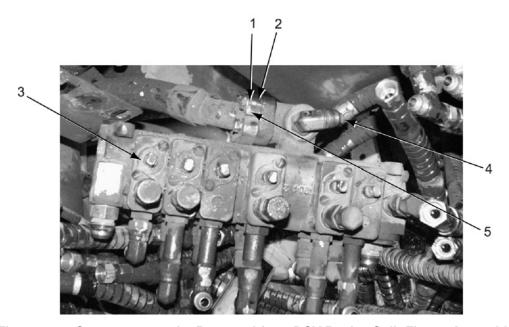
Components to be Removed from DCV Bank - Split Flange Assembly
